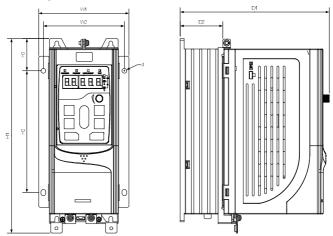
380V 1.5–7.5kW VFD flange mounting diagram Table C-4 380V 1.5–7.5kW VFD flange mounting dimensions (unit: mm)
